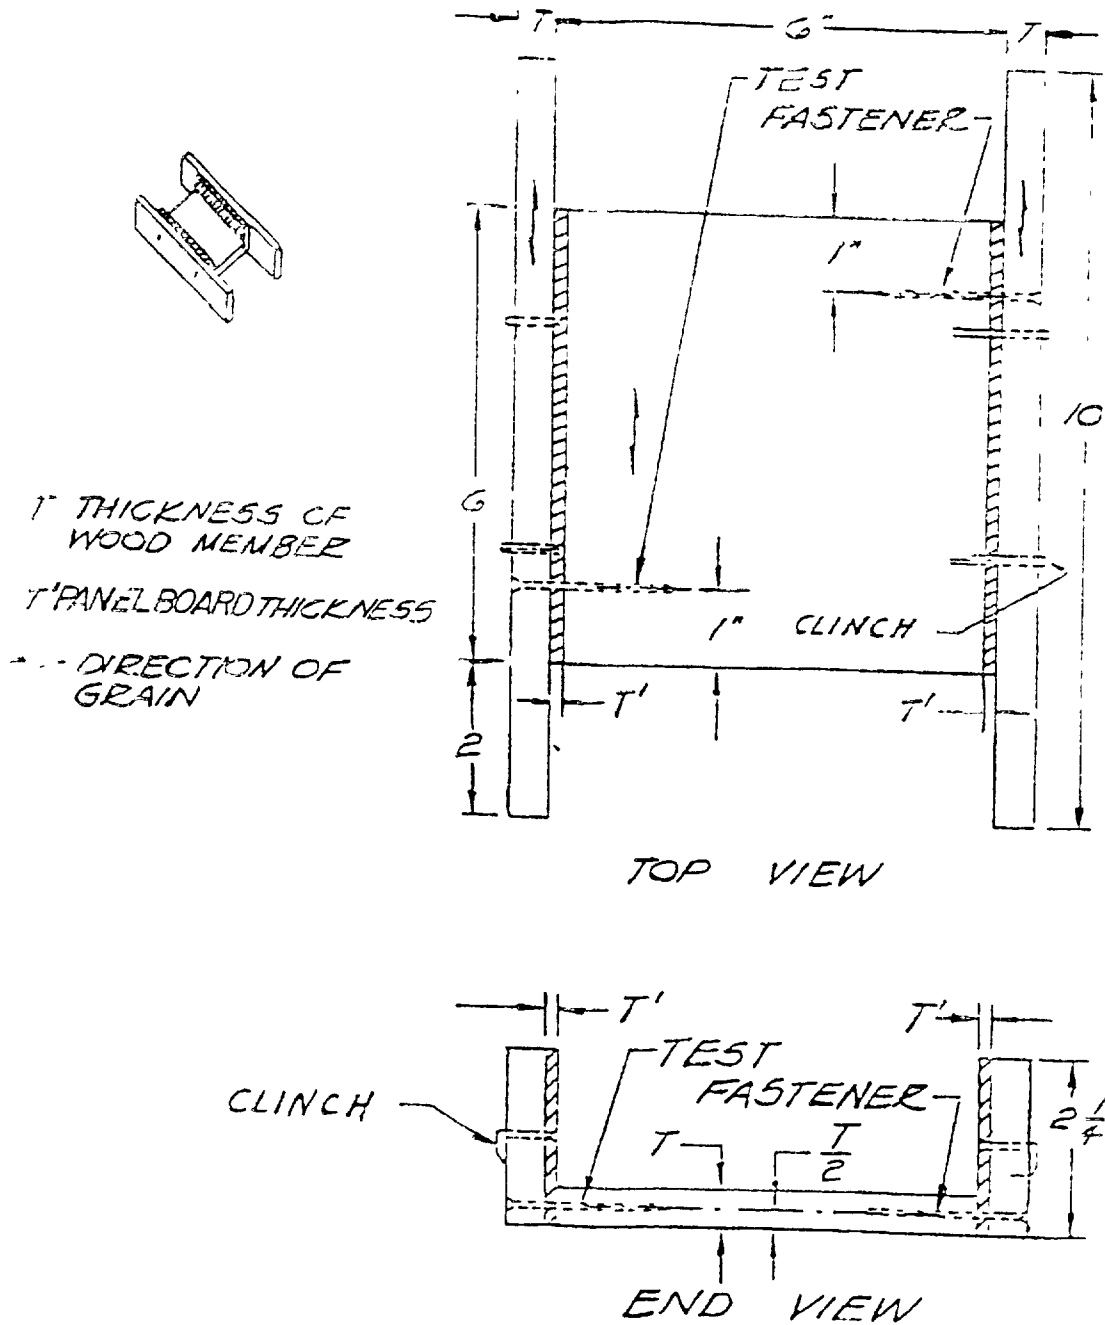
TEST SPECIMEN FOR LATERAL RESISTANCE TEST (FOR CONTAINER ASSEMBLY)
